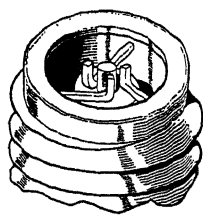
Lodge plug electrodes consisting of three square sectioned platinum wires.
